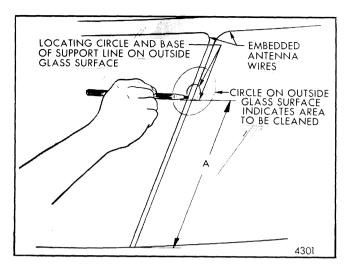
Locating Bonded Rear View Mirror Support on Glass
